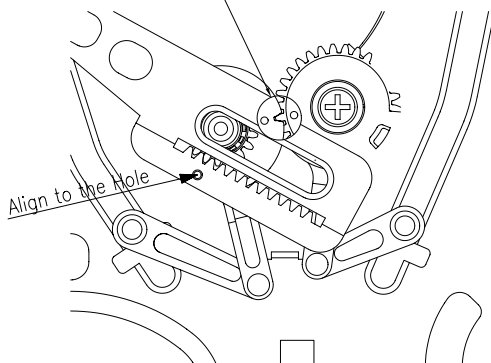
Assembly of the L/R LOADING AS and the LOADING RACK
